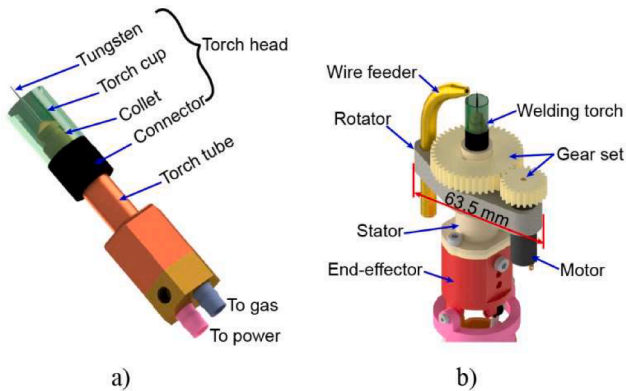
Redesign of bespoke welding torch for the mini manipulator. a) Welding torch redesign based on the off-the-shelf handheld welding torch by truncating the handle and handle bushing; b) Rotation mechanism for the wire feeder to adjust the wire feeding direction in real-time.
